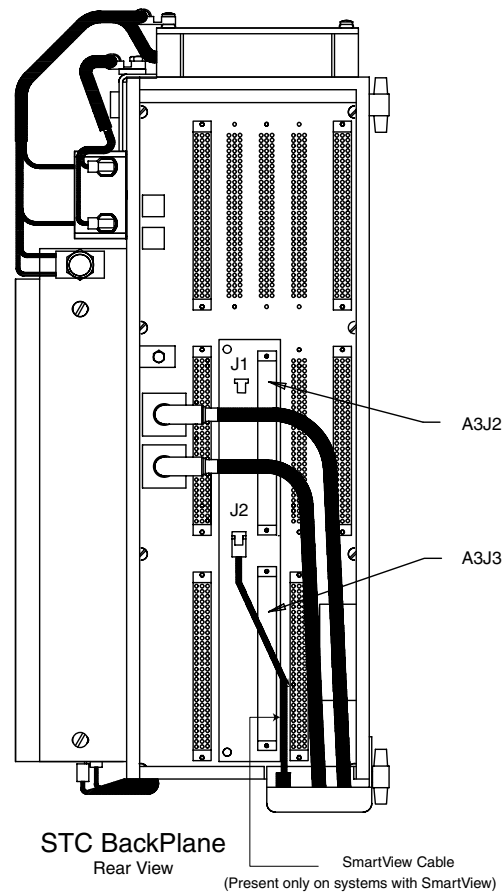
STC Backplane with the Cardiac Driver in Place
